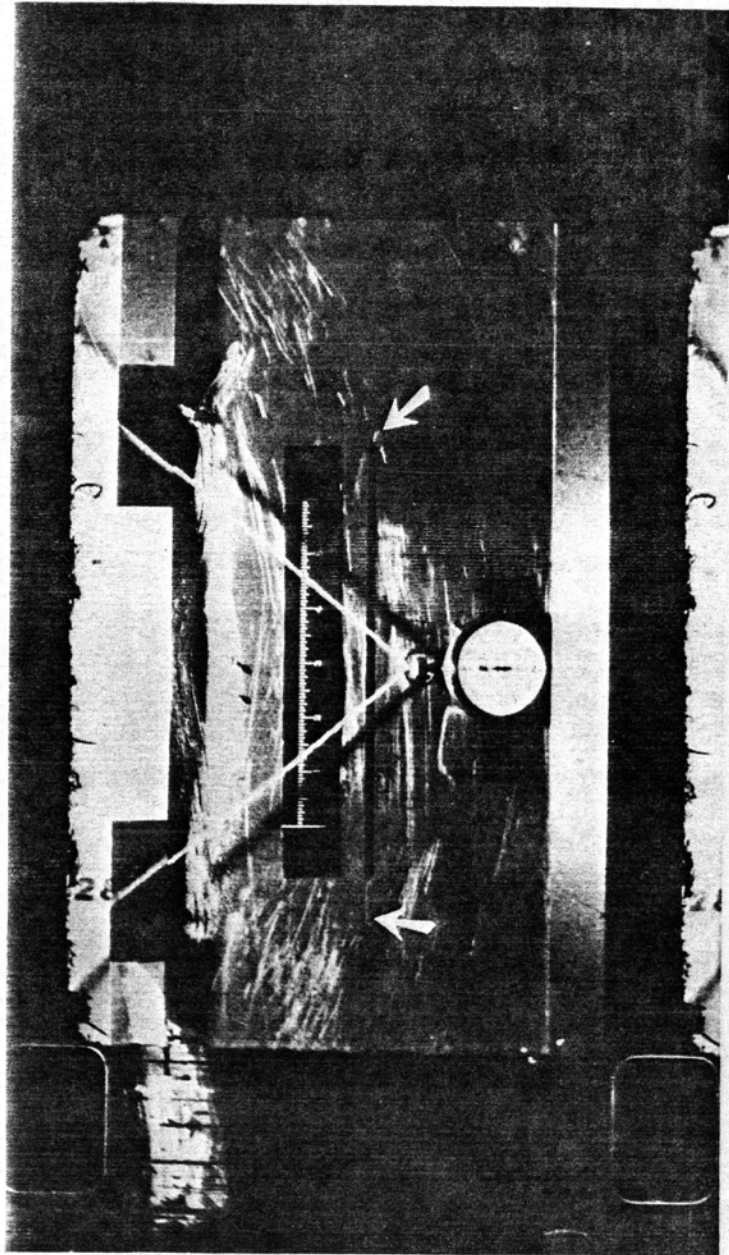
Photograph of crack just prior to instability in 1/8-inch thick 7075-T6 aluminum alloy. Photograph of the center 10 inches of the specimen.
